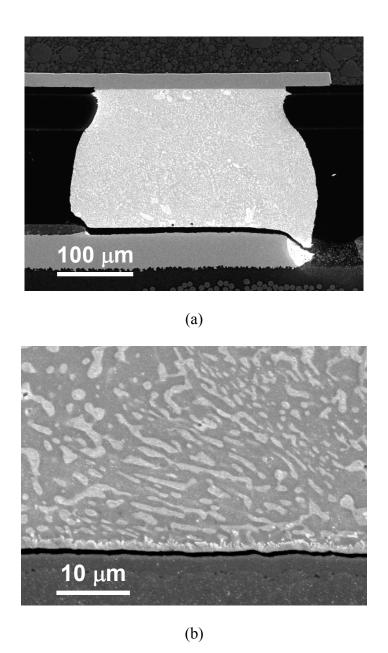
Cross Section (a) and Close-up (b) of Failed Solder Joint after Drop Test
